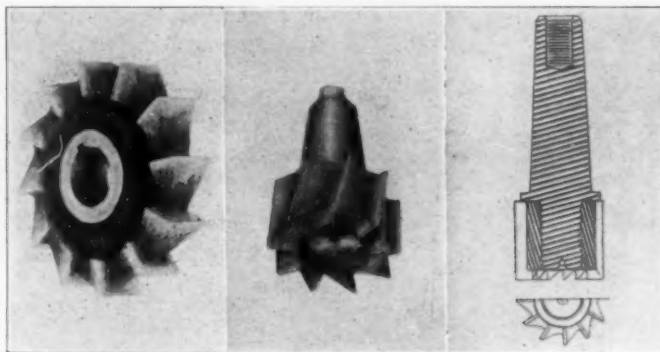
Cast High-Speed Steel Side Cutting Mill.
